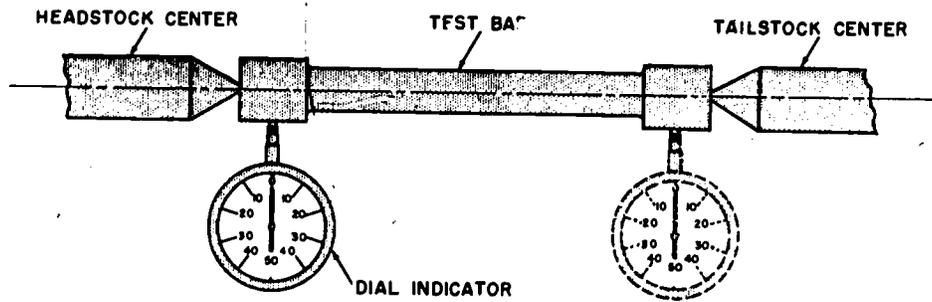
Alignment of lathe centers with a dial indicator.
